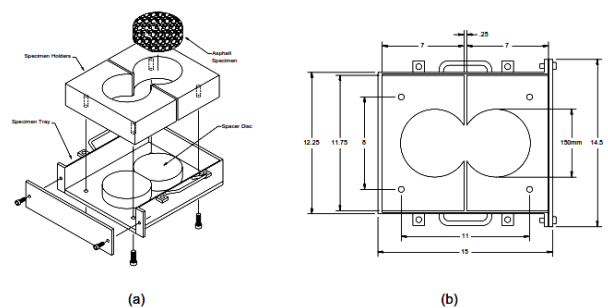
(a) Illustration of cylindrical test specimen installation configuration; (b) Dimensions of the cylindrical test specimen installation configuration (Tsai, 2016)
